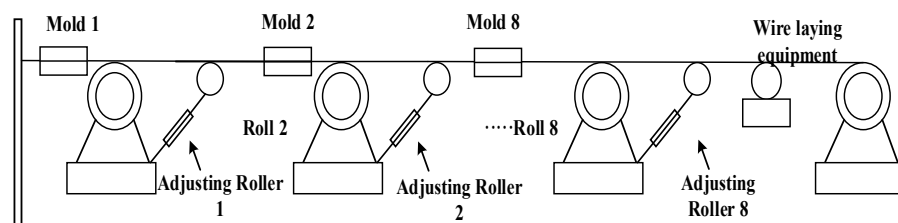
Schematic diagram of multi-pass straight drawing machine.
